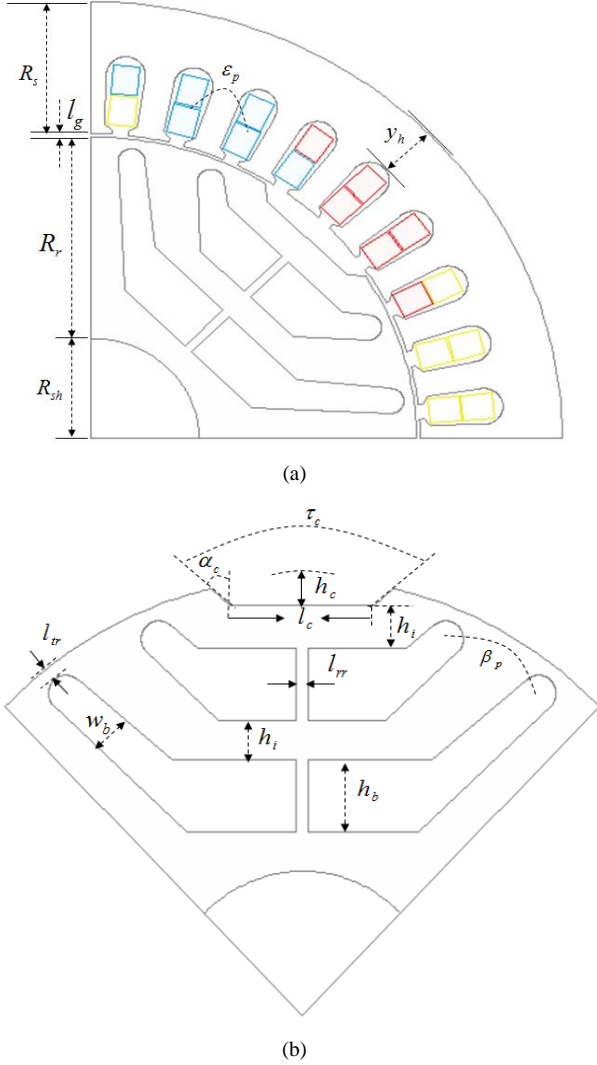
(a) main machine dimensions, (b) rotor design specifications
